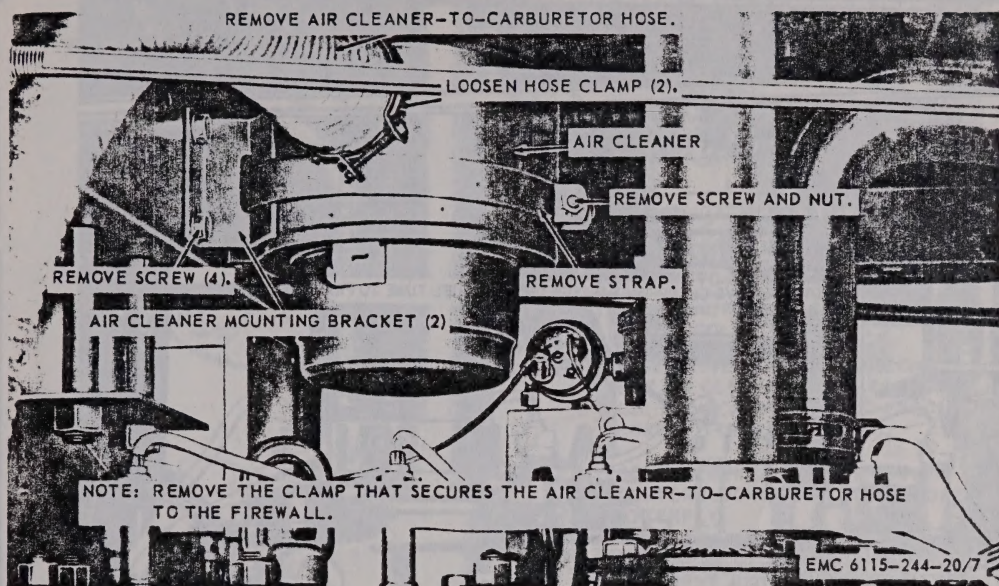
Air cleaner, air cleaner-to-carburetor hose, and air cleaner mounting brackets, removal and installation.
